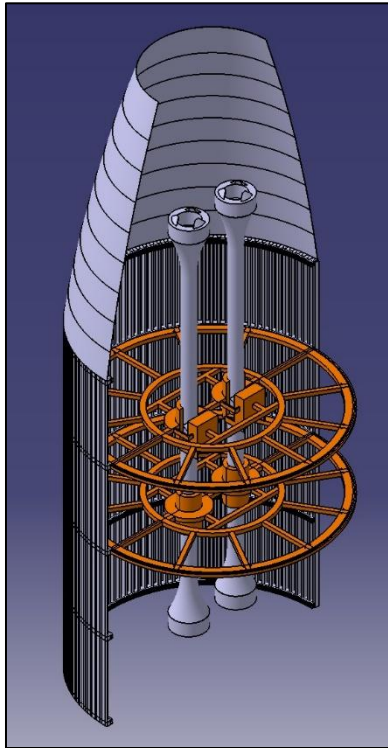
The Booms and the Fixtures in the Payload Bay.
